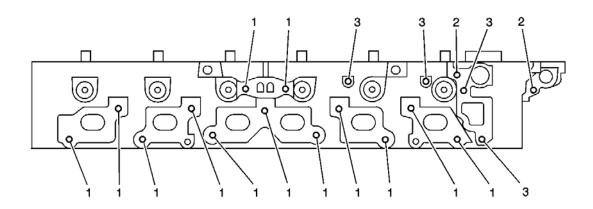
Cylinder Head Thread Repair - Exhaust Manifold Deck View Courtesy of GENERAL MOTORS CORP.
